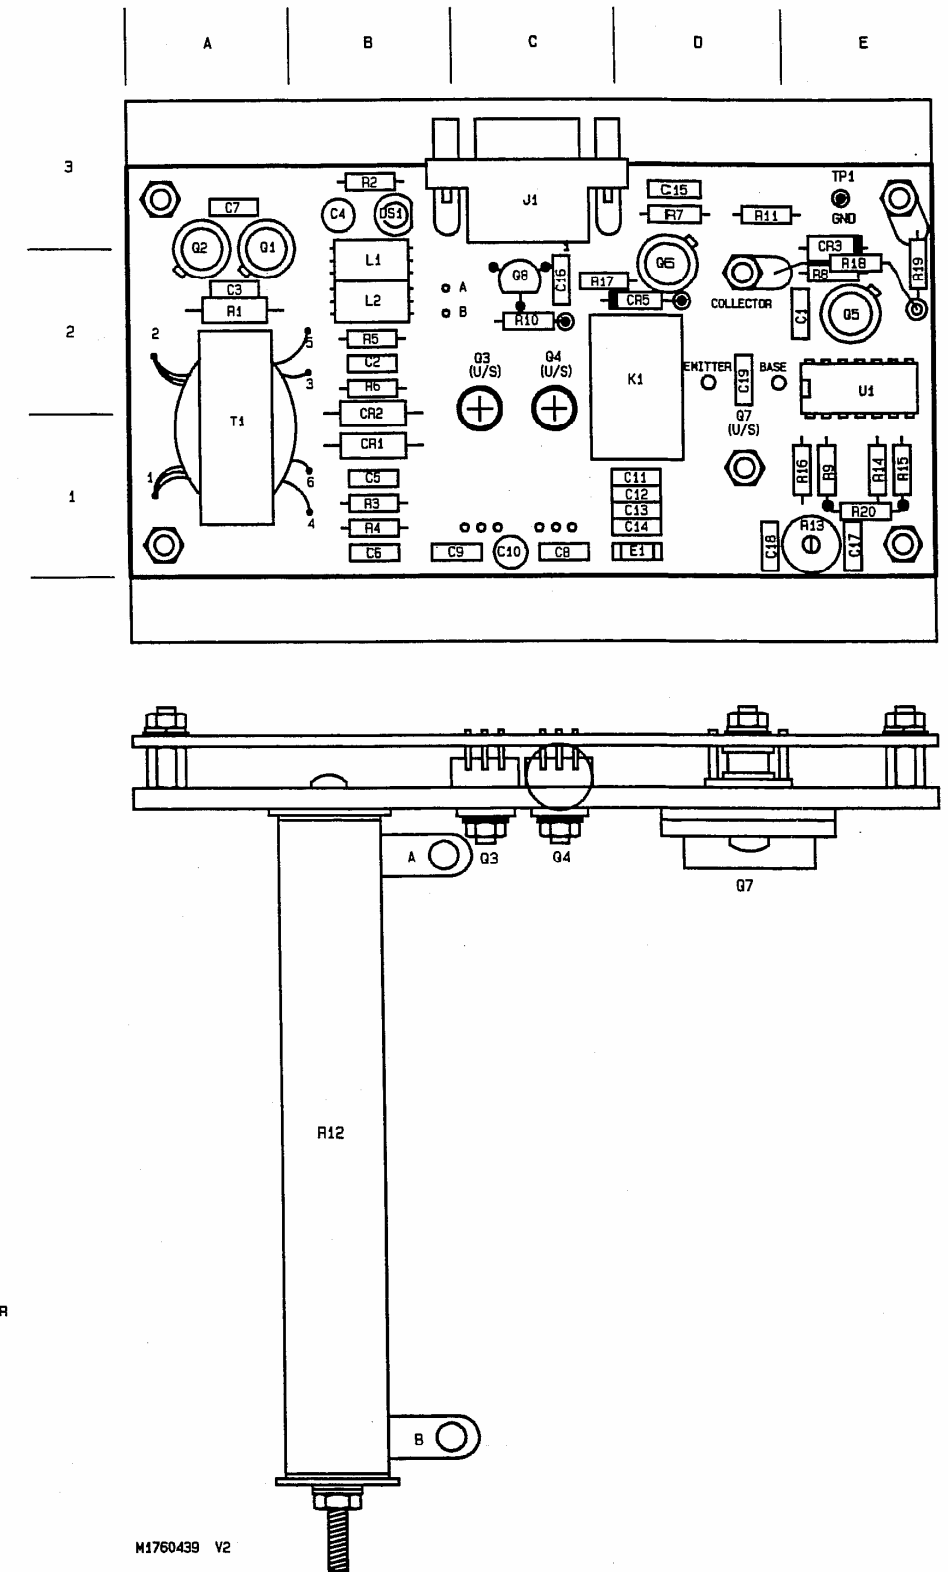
Assembly Detail – NAPA08E/01 RF Drive Buffer PWB
